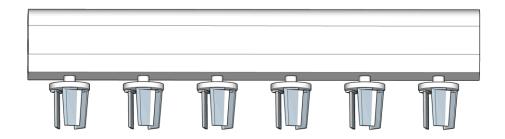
Rotary tilling blade assembly for horizontal shaft type (Azadbakht et al., 2014)
